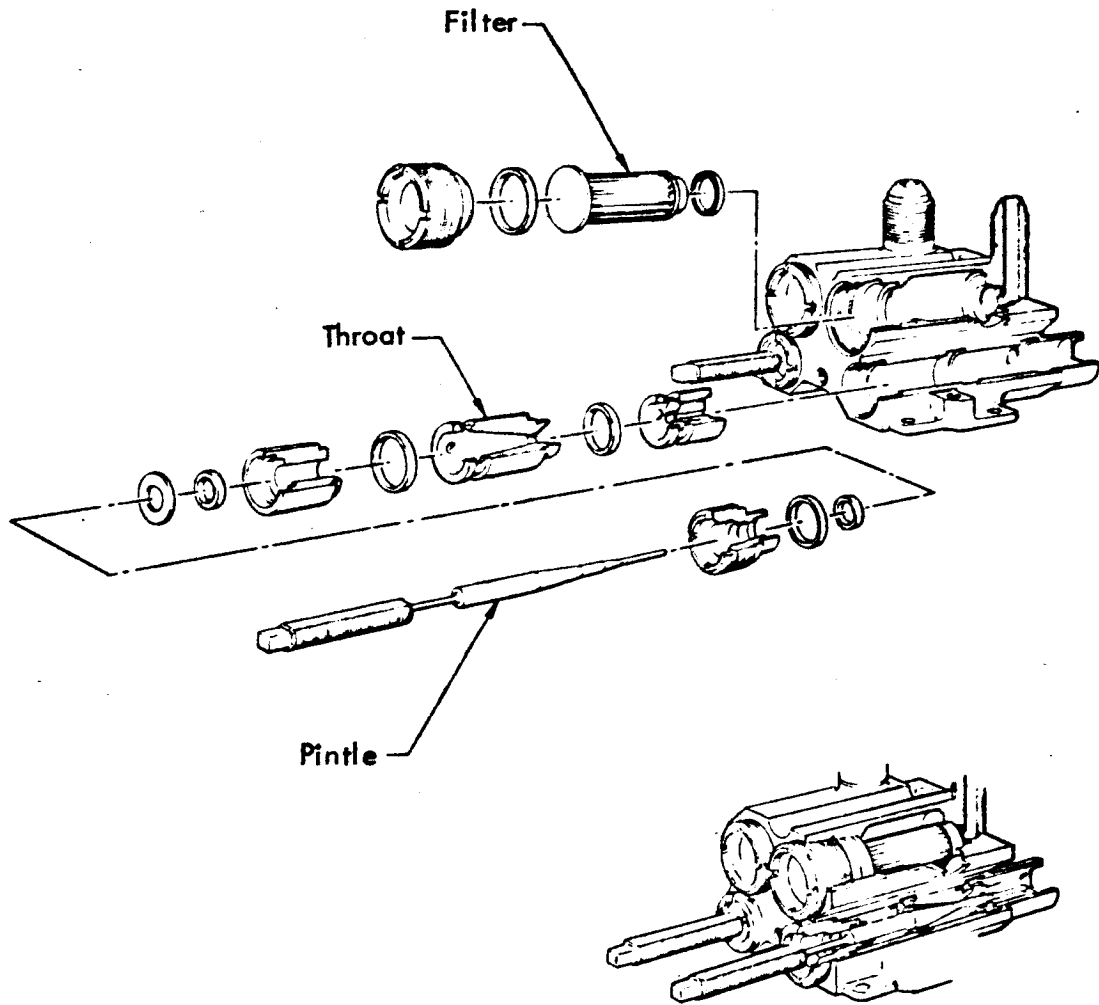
MIRA 150A Flow Control Valve Assembly (Exploded View)
